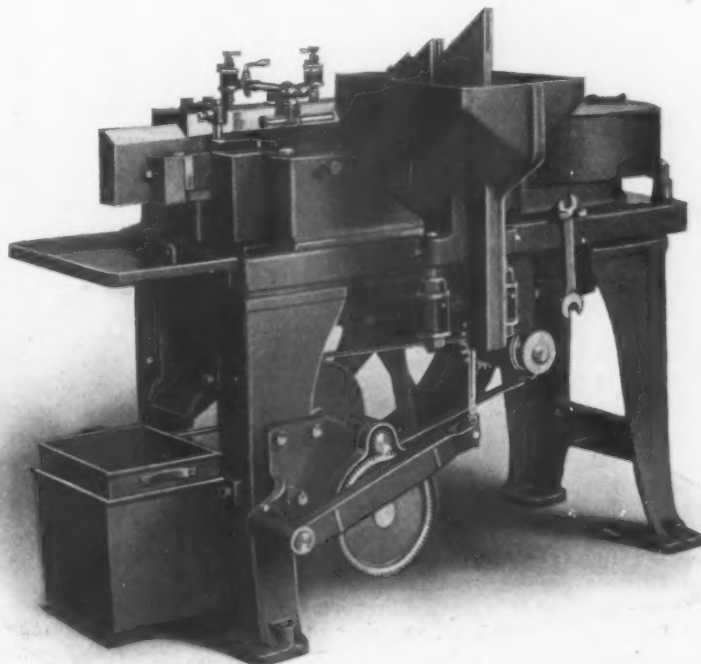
The Same Machine as Shown in Fig. 5, Arranged with Automatic Feeding Mechanism.
